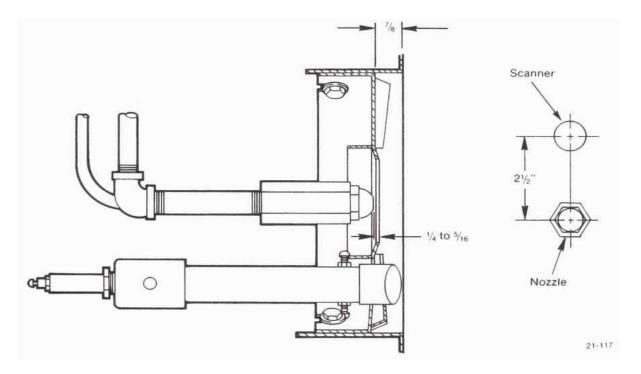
MMG 14-30 Drawer Assembly Dimensions
